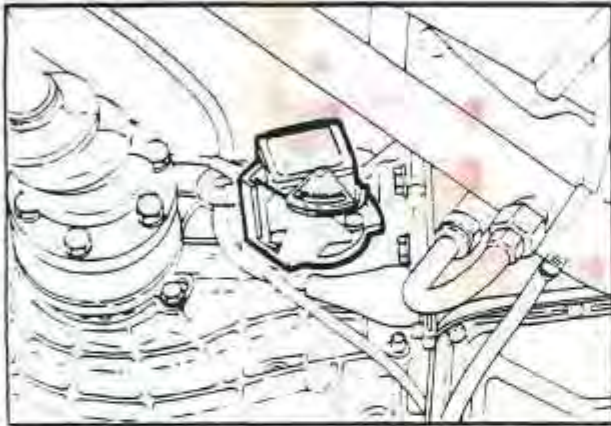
GOVERNOR COMPUTER ASSEMBLY REMOVAL
